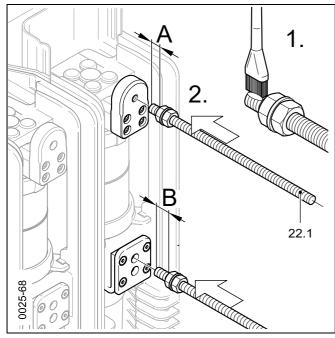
Cleaning and mounting threaded rods (22.1) for contact arms (22)
